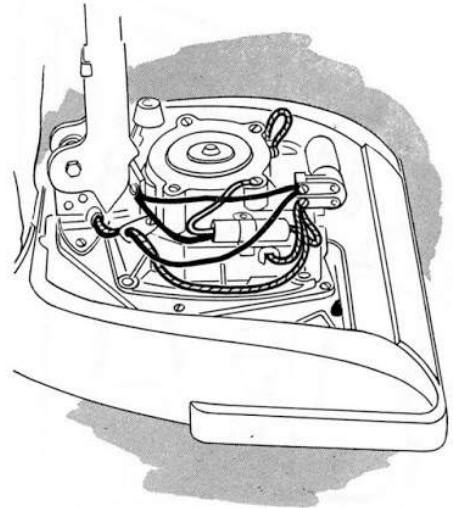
Models 90, 91 and 913 motor wiring diagram
